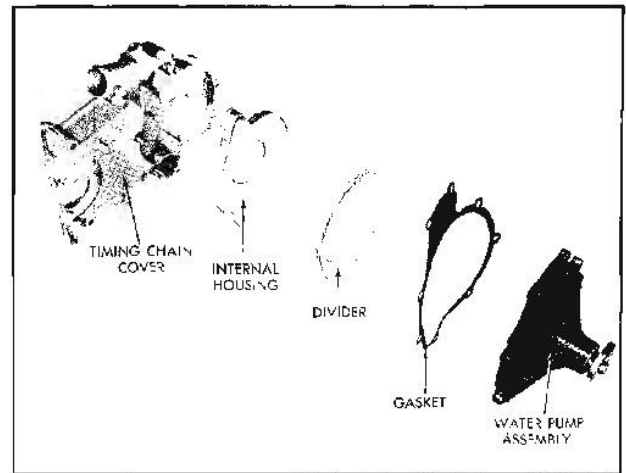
A-5 V-8 Water Pump Assembly and Timing Chain Cover Exploded View
